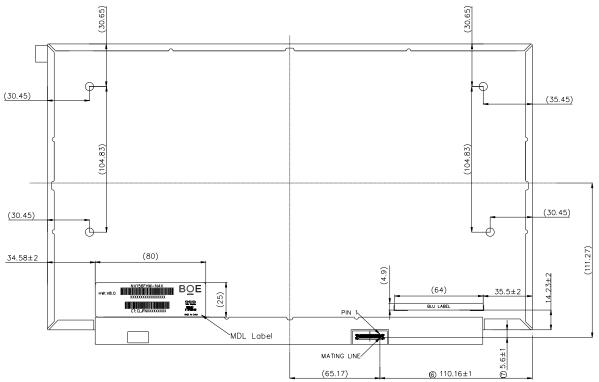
TFT-LCD Module Outline Dimensions (Rear view)
